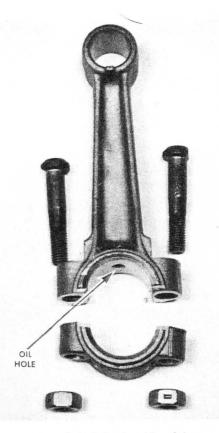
An oil hole in the side of the connecting rod lets oil get between the rod and crankshaft.
